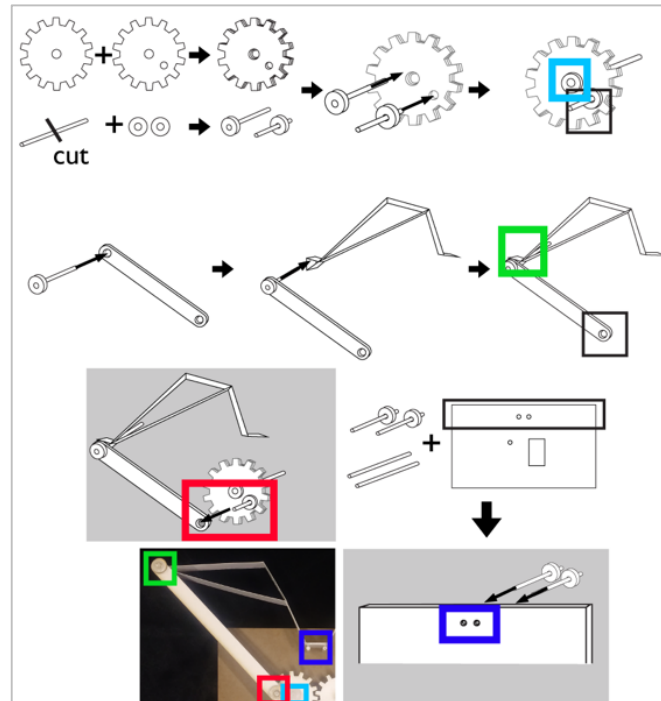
This studio will introduce associate prototyping methods using craft materials with the generated parts. This figure shows how to use lollipop sticks as axles to mount gears and linkages to the stand.
